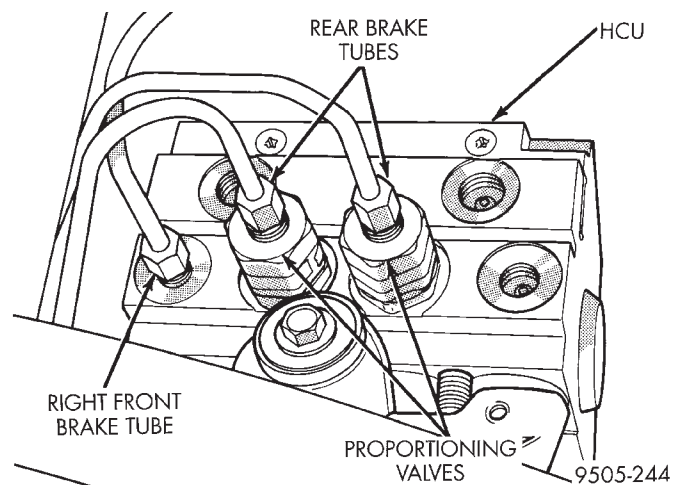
Rear Brake Tubes And Right Front Brake Tube At HCU
